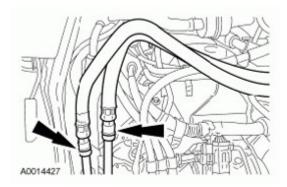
Locating Auxiliary Heater Hoses Courtesy of FORD MOTOR CO.
